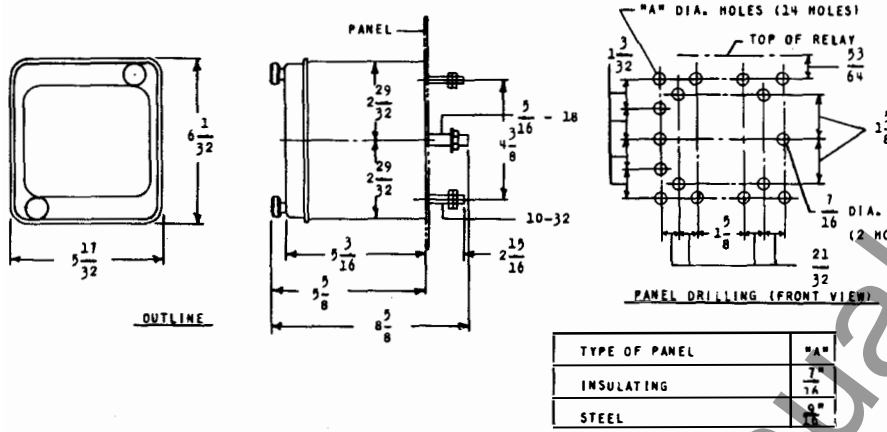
Outline and Panel Drilling Dimensions for Type HFA Relays in Standard Case
